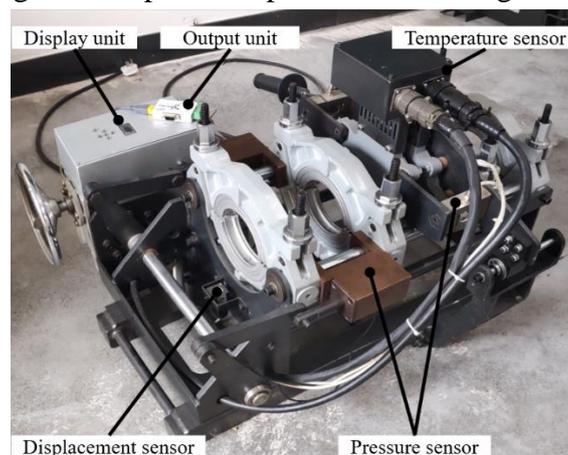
Experimental equipment of PE pipeline butt fusion welding
